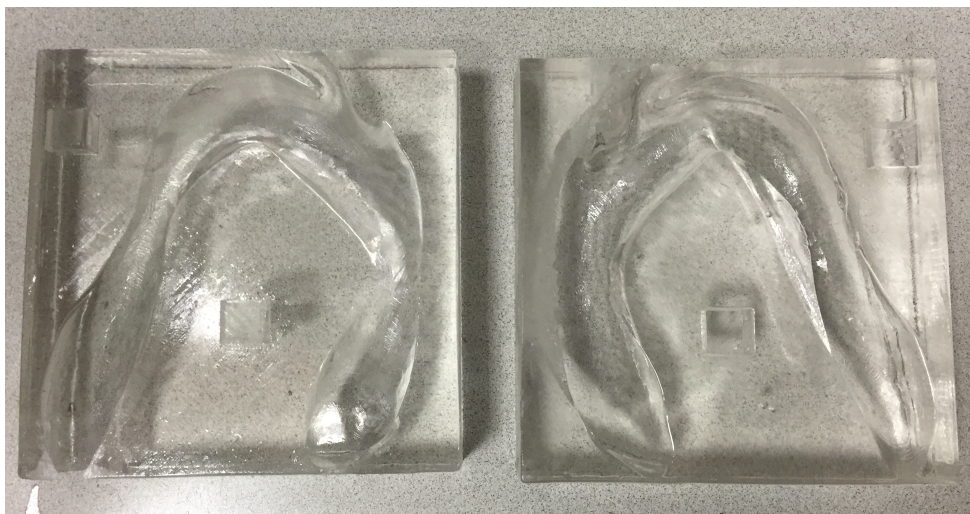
The PDMS casting of the 3D printed parts with Part A (left) and Part B (right).
